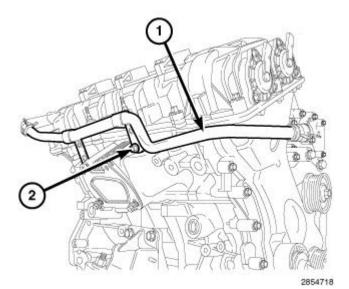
Heater Core Supply Tube Support Bracket & Retaining Bolt
